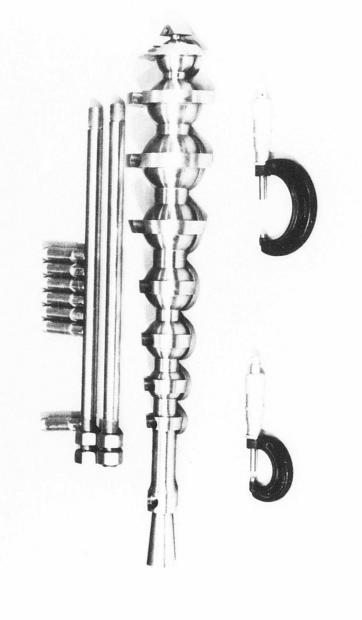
Root-End Fitting Machined Parts and Tooling Studs.
